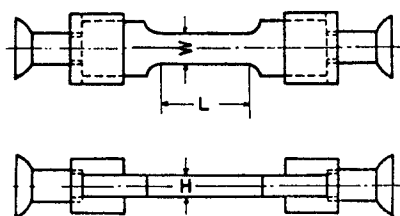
Schematic drawing of the specimen used. The gauge length L is 12 mm, the width W is about 4 mm and the thickness H is about 3.5 mm respectively.
